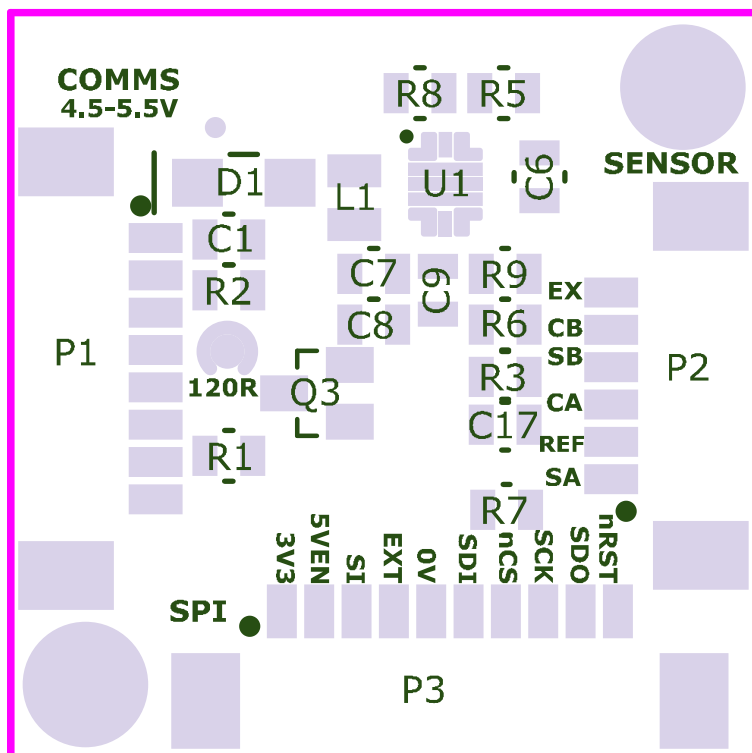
CAM622 Multi Comms Board Component Placement, Bottom
